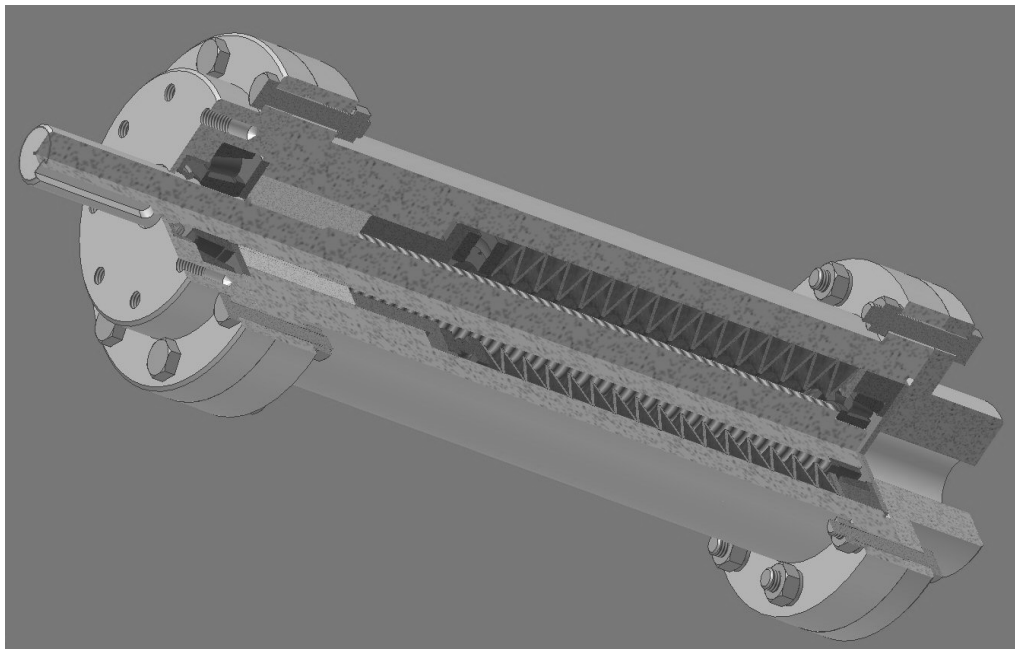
View of the one-way prototype of the metal flexible torsional coupling
